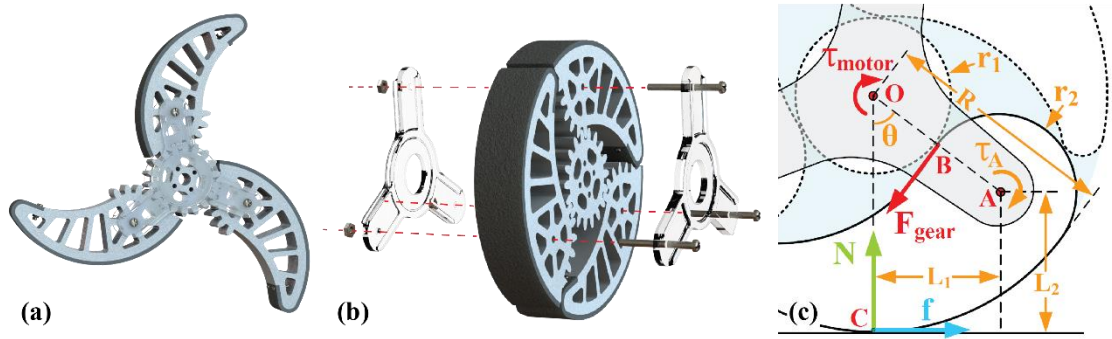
Fully assembled wheel (a), exploded view of components (b), free body diagram of partial gear (Image courtesy: [34])
